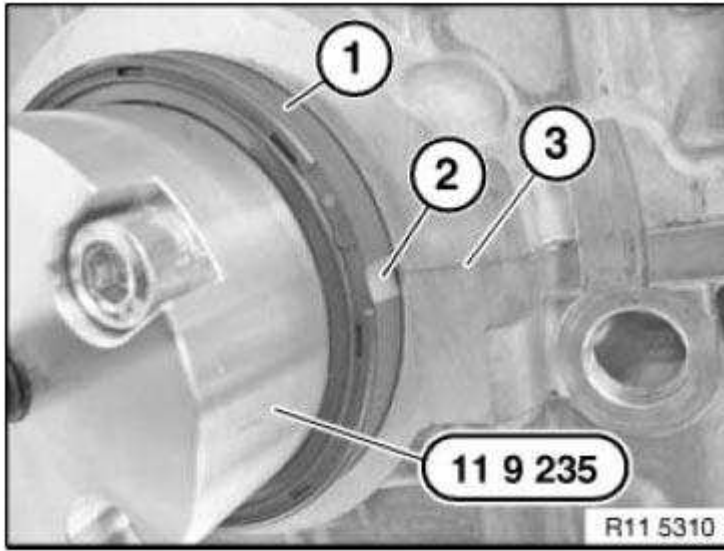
Identifying Radial Shaft Seal , Housing Partition And Groove
